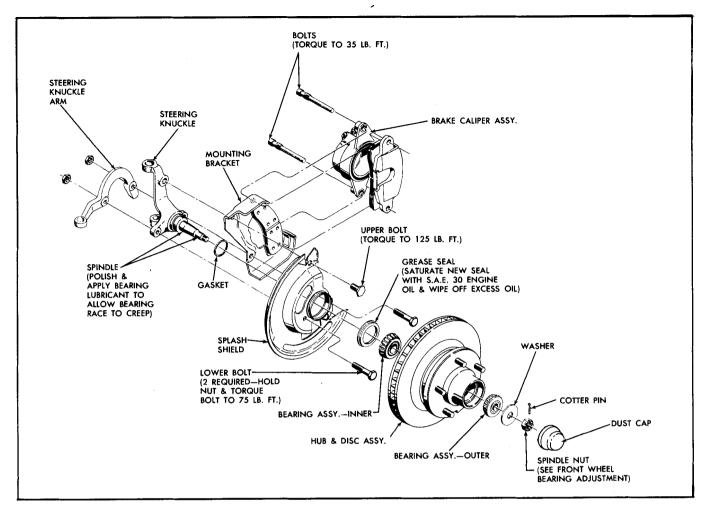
E-17 Installation of Steering Knuckle Hub and Disc Assembly - A and G Series
